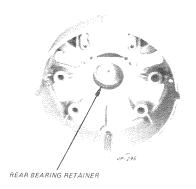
REAR BEARING RETAINER INSTALLATION
